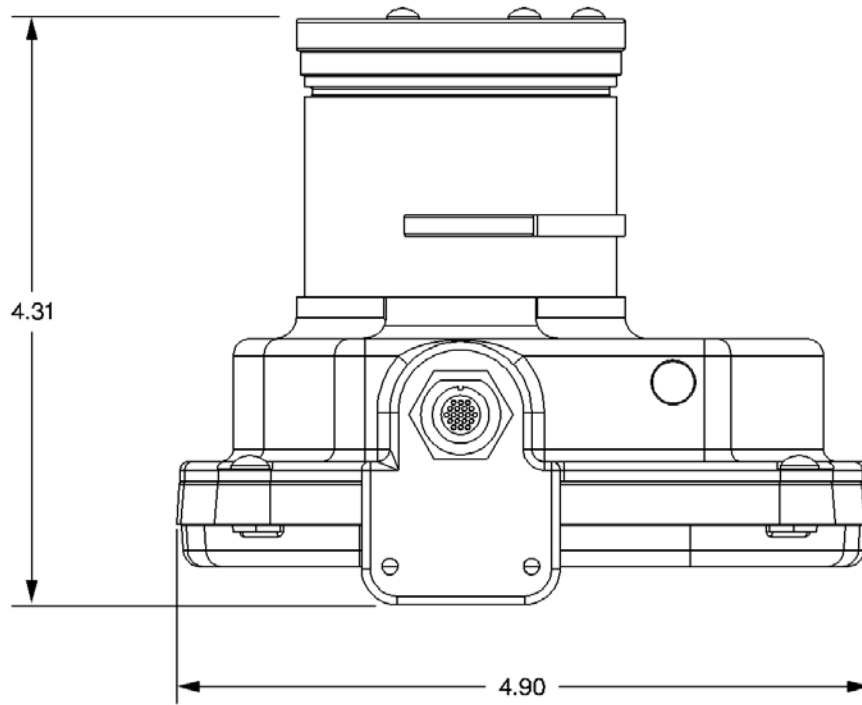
Sensor Assembly Outline Dimensions (PN 325359-2, -6, -8)
